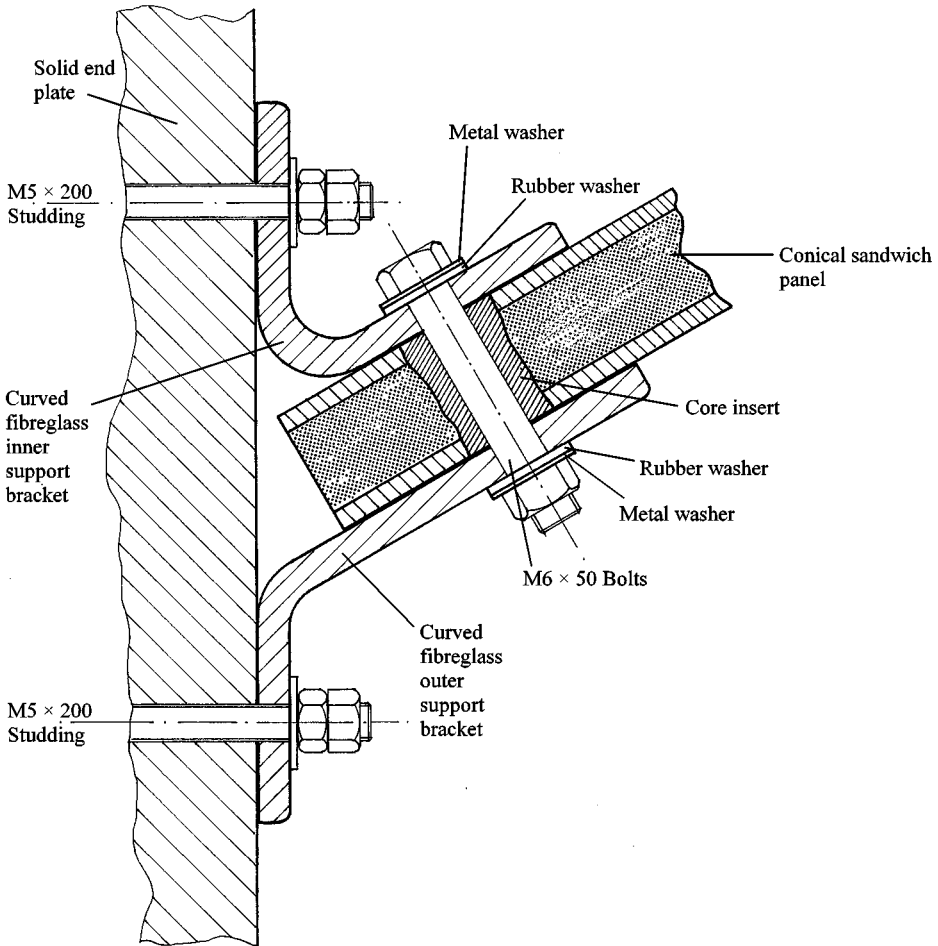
Details of the test-rig end fixtures, illustrating the means of providing a circumferential clamped edge support (longitudinal section).
